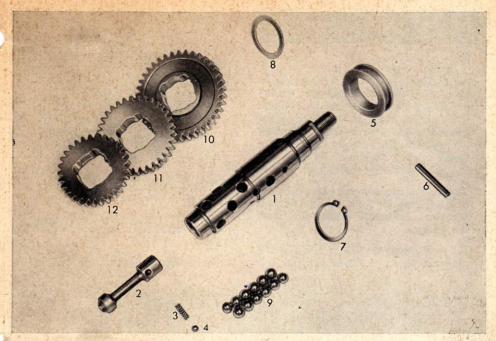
Gear shaft stripped down (from engine No. 01 002 909)
